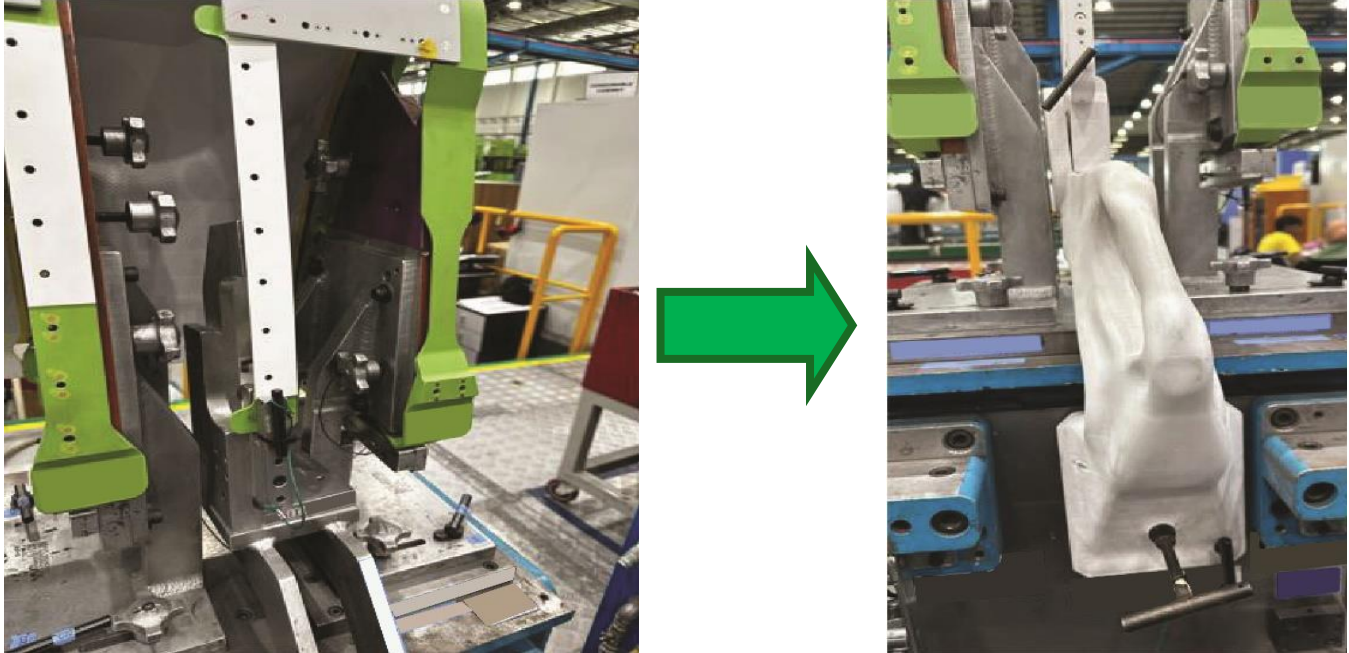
Assembly of the IC jig into the main assembly jig (left) the original aluminium jig holding the aerospace component during the assembly process (right) the AM jig
